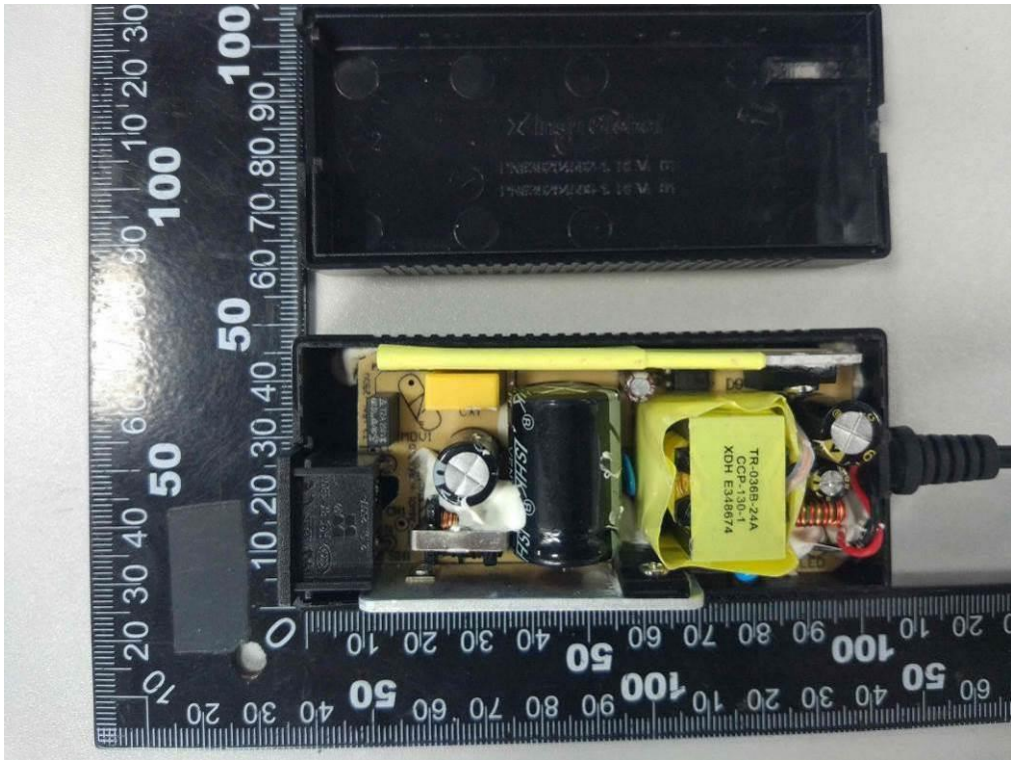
Inside view of unit (Desktop type with AC Inlet)
